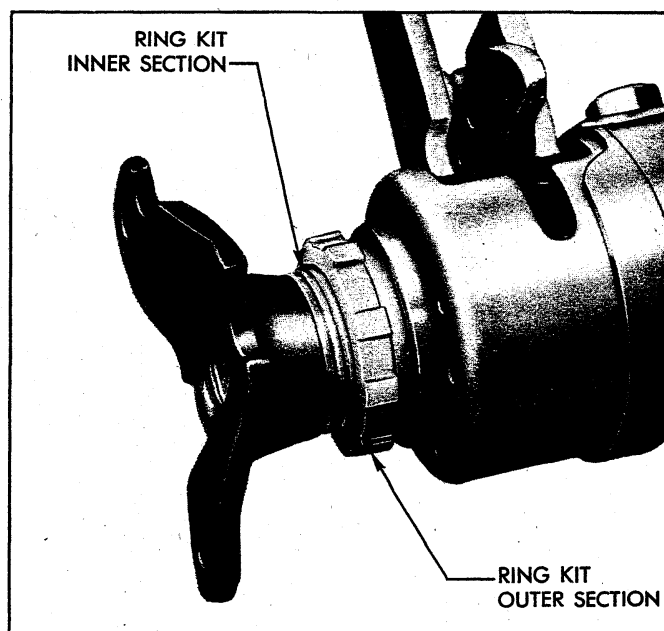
Tolerance Ring Kit—Final Adjustment
